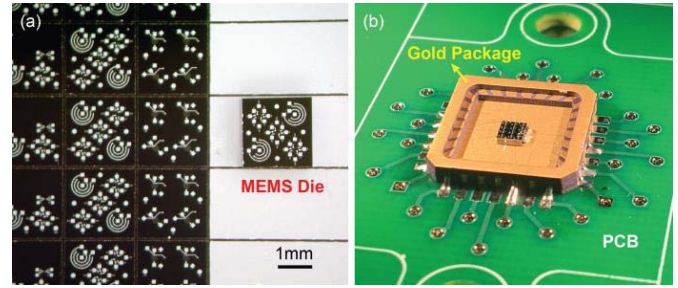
(a) Diced devices; (b) Device wirebonded on a gold package and mounted onto a PCB.
